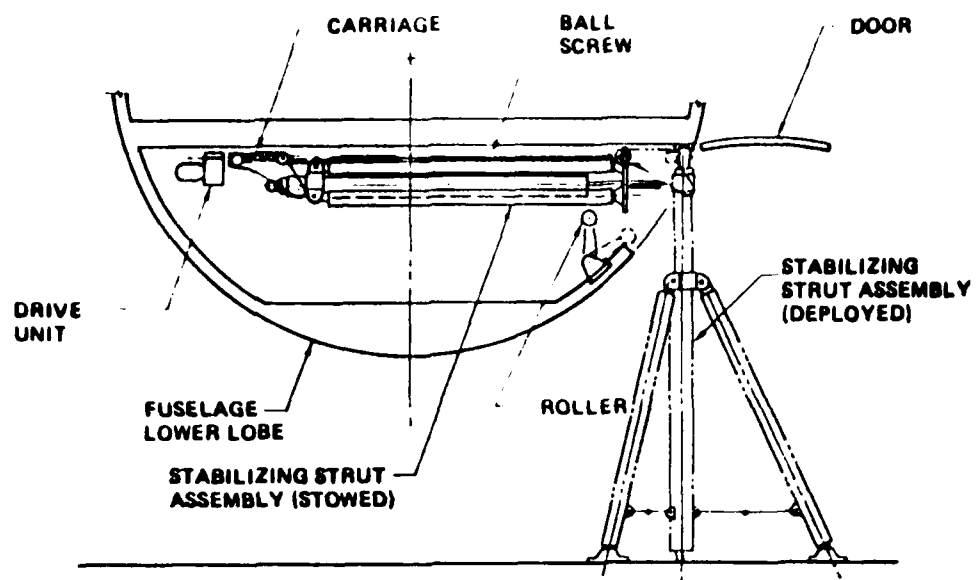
Stabilizing Struts - Installation and Deployment
